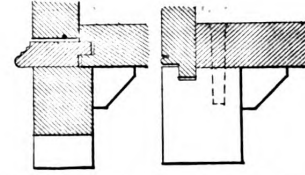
Section through Lower Part of Front. Fig. 4.—Section through Lower Portion of Side of the Cabinet.
